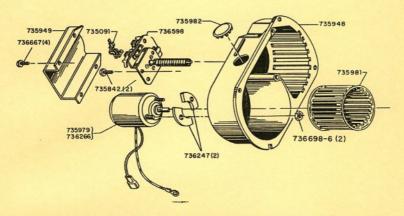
VENT AIR BLOWER ASSEMBLY 735945-736488 & 736654
